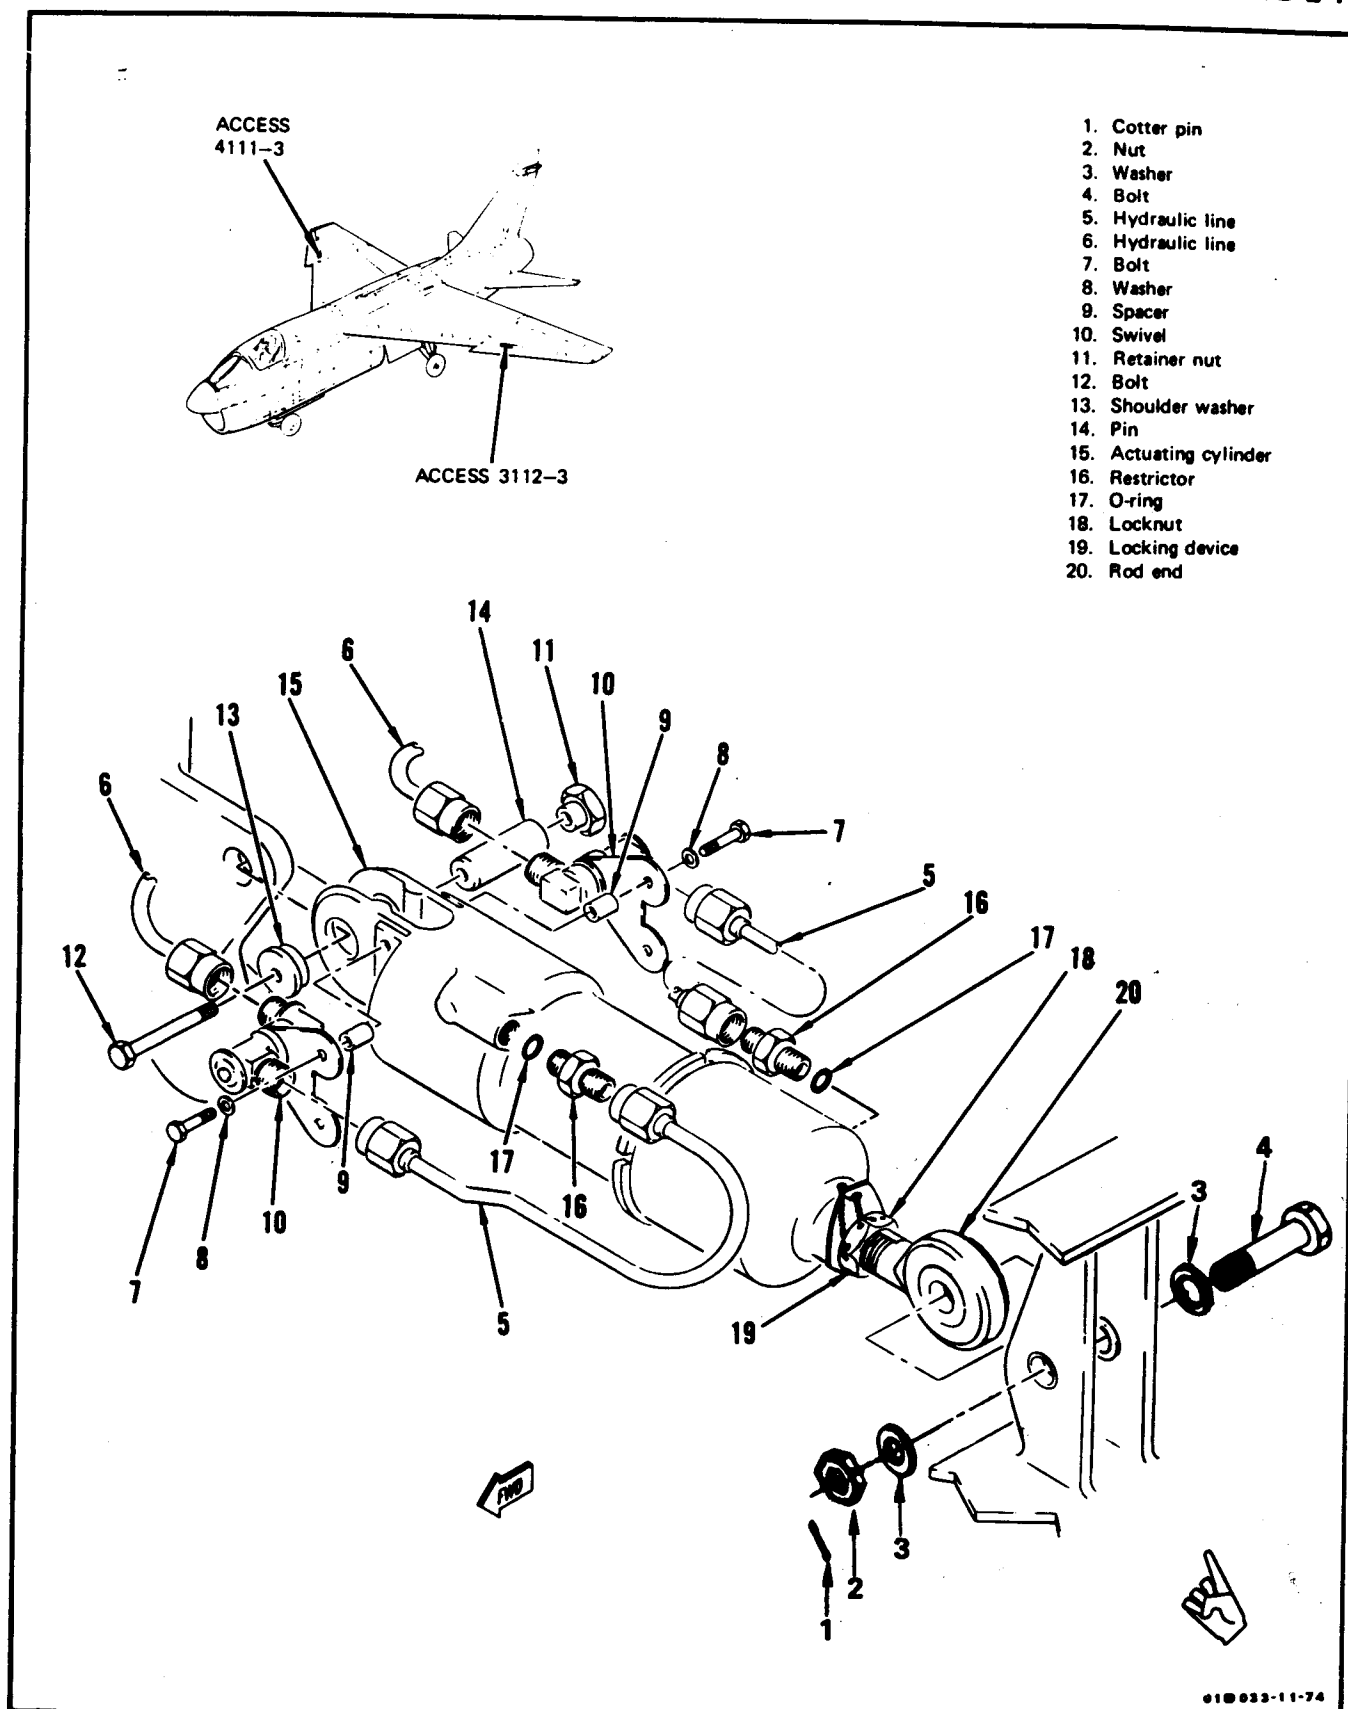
Wingfold Actuating Cylinder Removal and Installation
